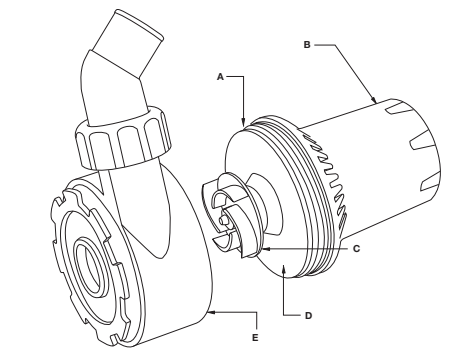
A. Note: Motor will be loose, don't let water enter this joint B. Motor Housing C. Impeller D. Motor Plate E. Pump Chamber	Figura 6 A. Importante: El motor estará suelto; no permita que el agua entre en esta junta. B. Bastidor del motor C. Impulsor D. Placa del motor E. Cámara de la bomba	Figur 6 A. OBBS! Motorn kommer att sitta löst, låt inte vatten komma in i denna skarv. B. motorhus C. impeller D. motorplatta E. pumpkammare
